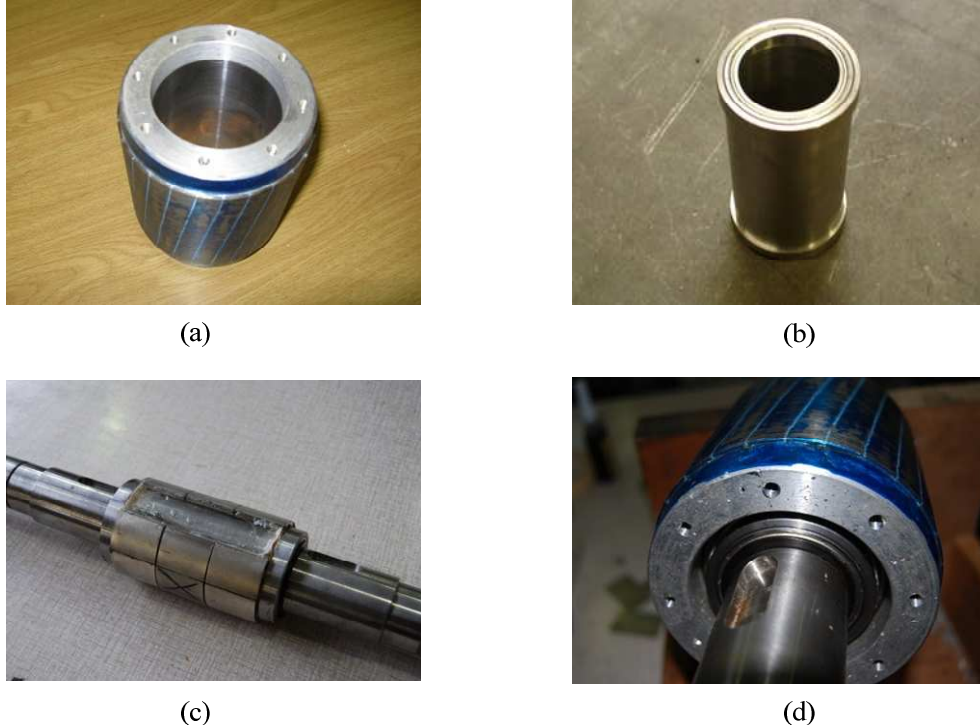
(a) Modified induction machine cage rotor; (b) PM cylindrical shell; (c) PM-rotor mounted on the main shaft; (d) PM-rotor assembled within the cage.
